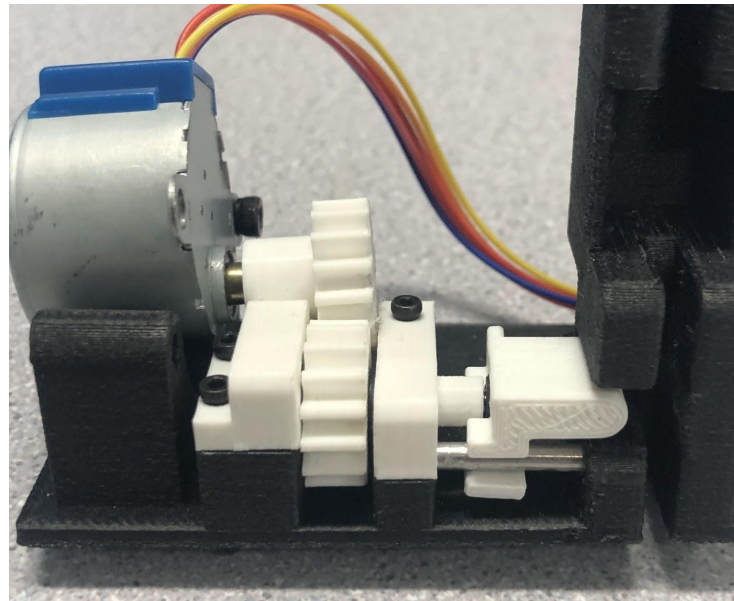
Design 3 iteration using revision gear ratio and 12 volt stepper motor with carbon fiber mount
